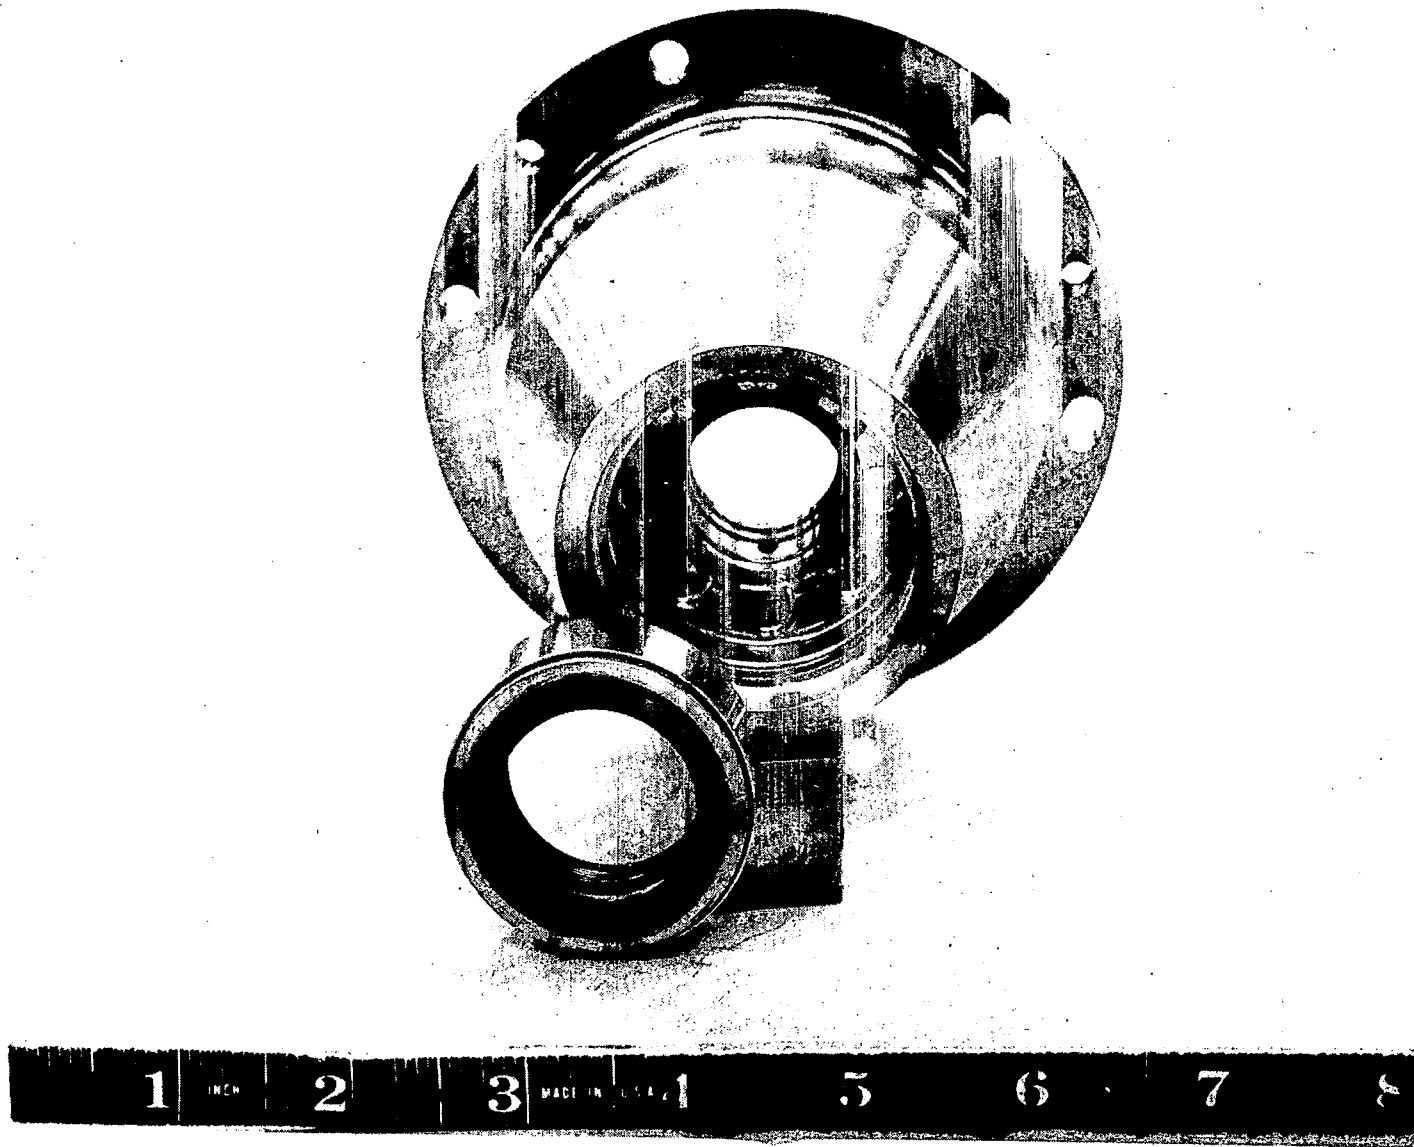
Seal and Seal Housing - Seal Test Rig X-22338
